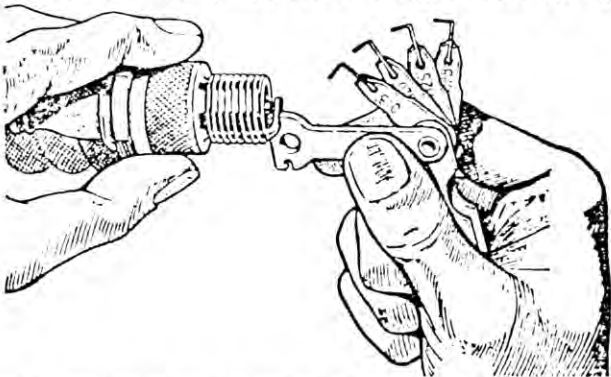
Bending bar on a typical gapping tool being used to bend the ground electrode. Note the wire-type thickness gauges on this tool.
